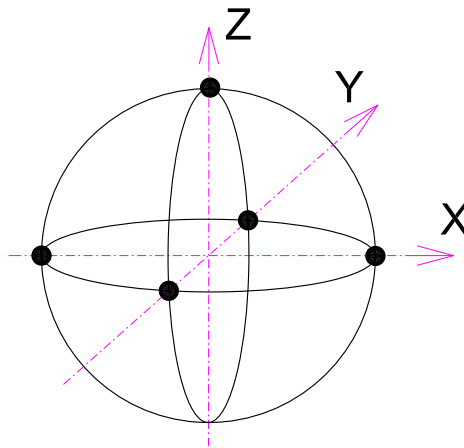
Measurement setup for calibration of the CT ball plate using the CARAT tactile CMM.
